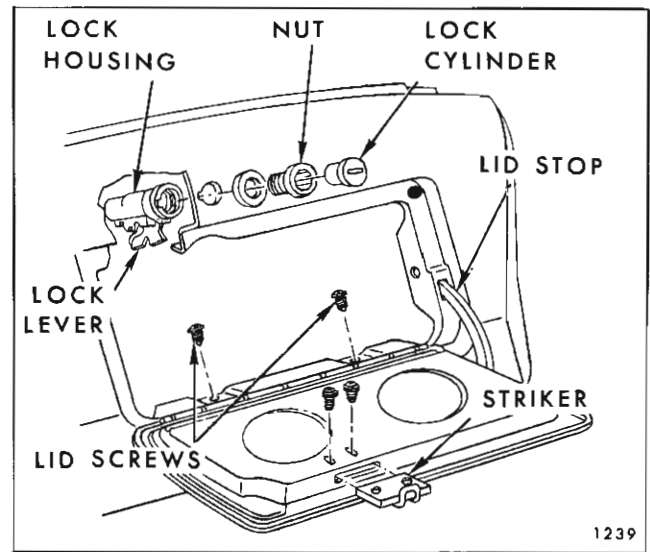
C17—Instrument Panel Compartment Door Assembly - 43-44000 Series
